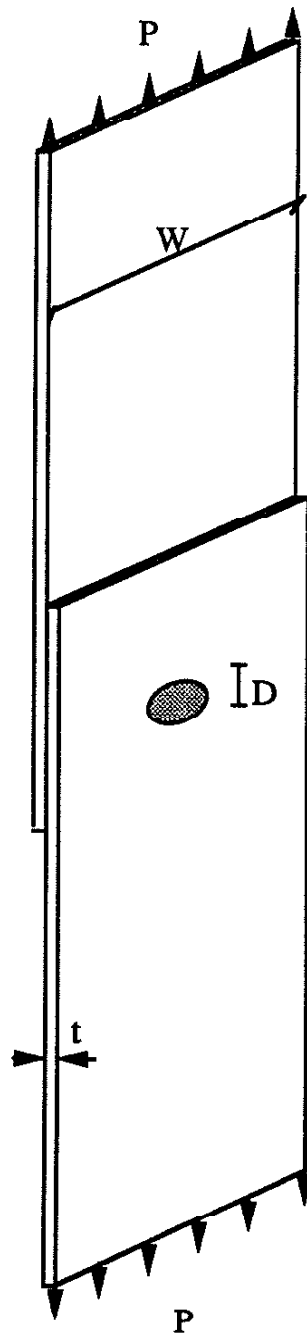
Basic dimensions for the tensile-shear specimen
